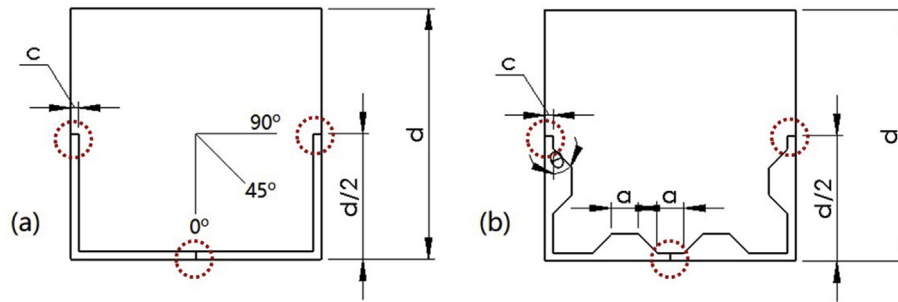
Cross-sections of beams with (a) plain reinforcement and (b) corrugated reinforcement. (Circled regions denote the continuous weld lines connecting tube and reinforcement).
